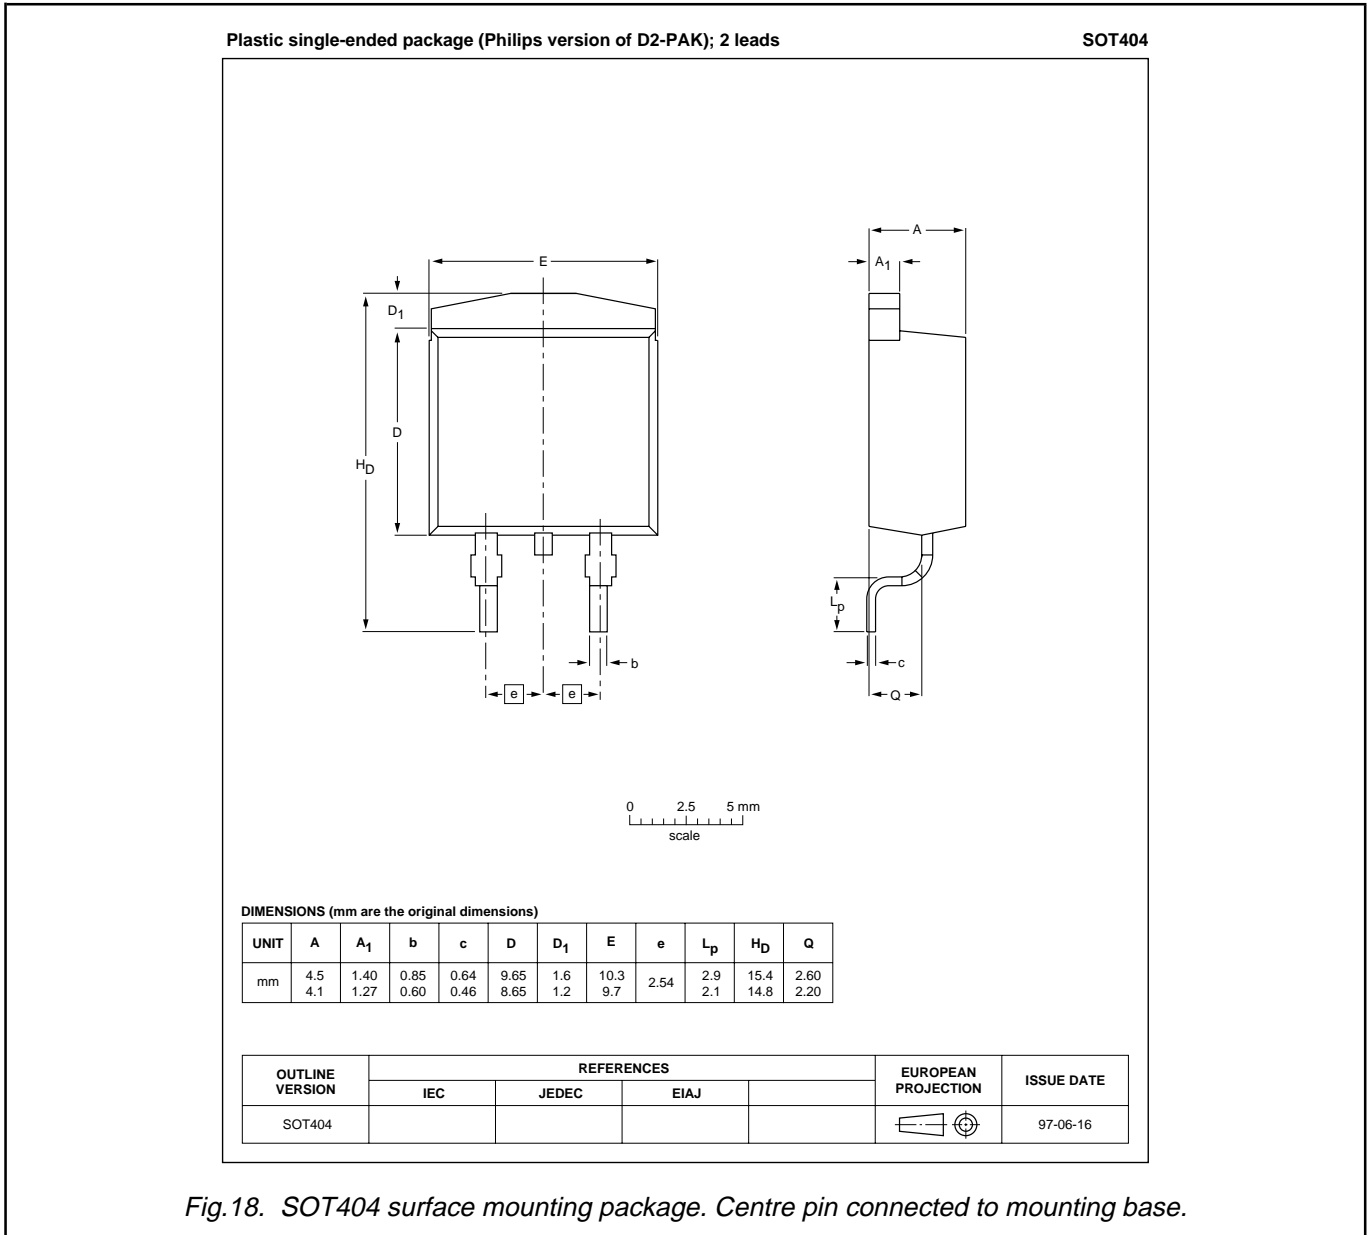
SOT404 surface mounting package. Centre pin connected to mounting base.
